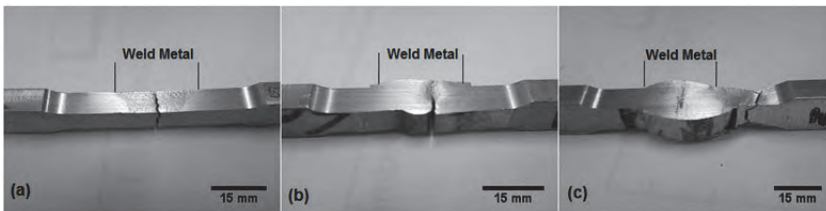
Representative photographs of the tensile fractures observed in 5083 welded using ER5356, ER5183 and ER4043 filler wires: (a) fully dressed FA-GMAW weld; and (b) undressed FA-GMAW weld; and (c) undressed SA-GMAW weld.
